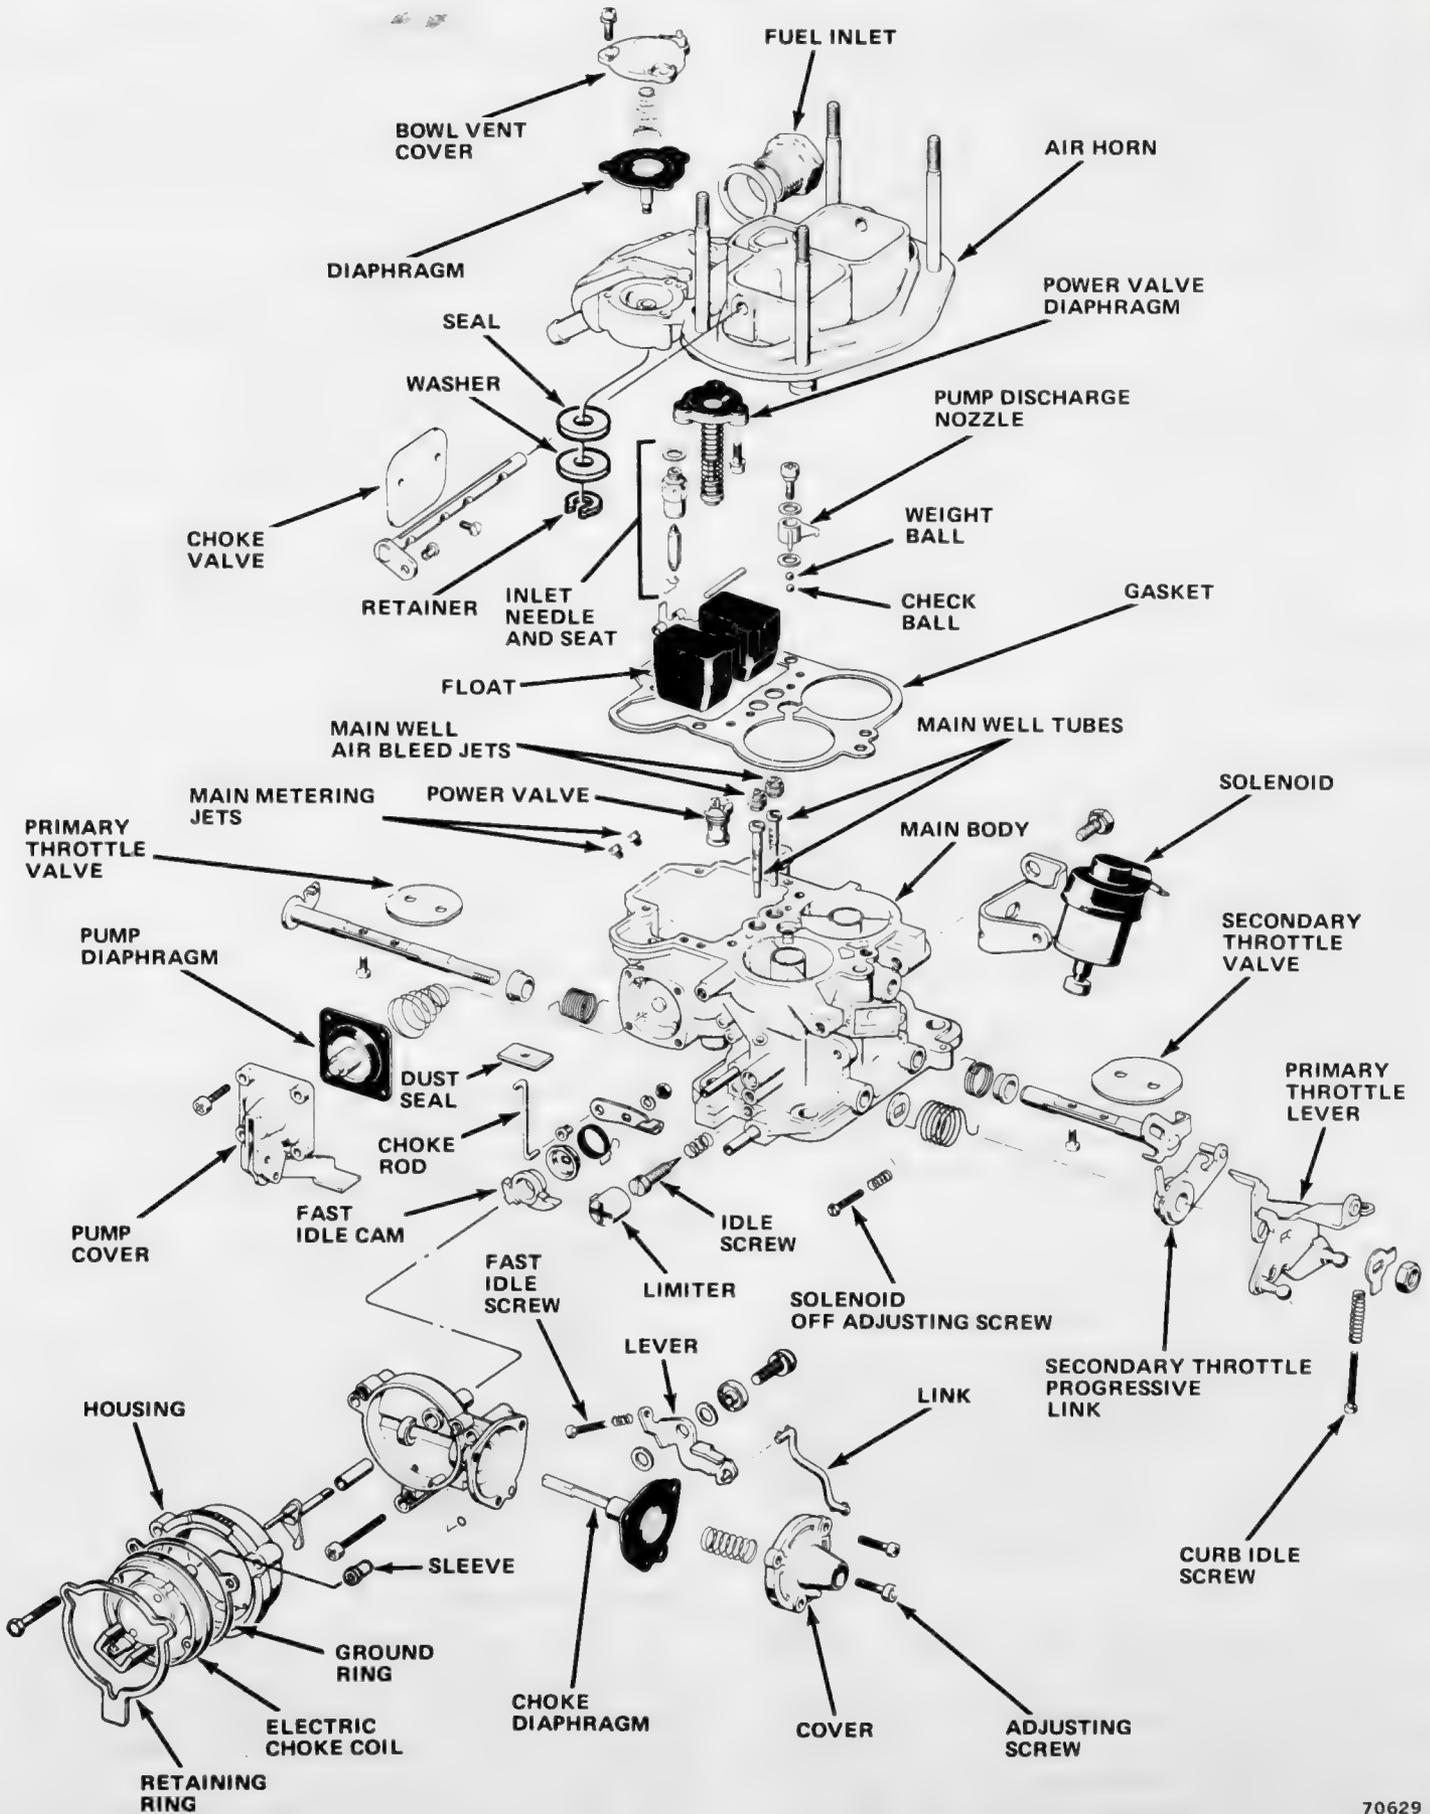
J-24 Parts Identification—Holley-Weber Model 5210
